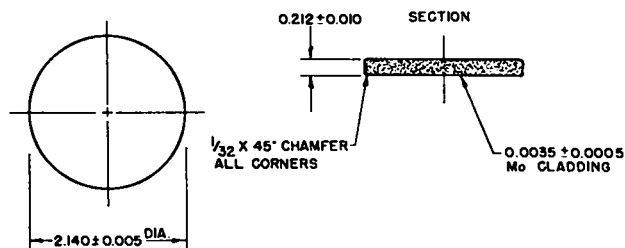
Schematic of Typical SSC Disc showing dimensions, clad, and edge chamfer
